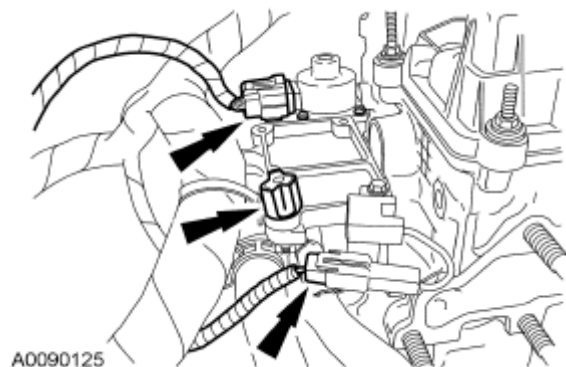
Locating Exhaust Gas Recirculation (EGR) Valve & Radio Interference Capacitor Electrical Connectors
